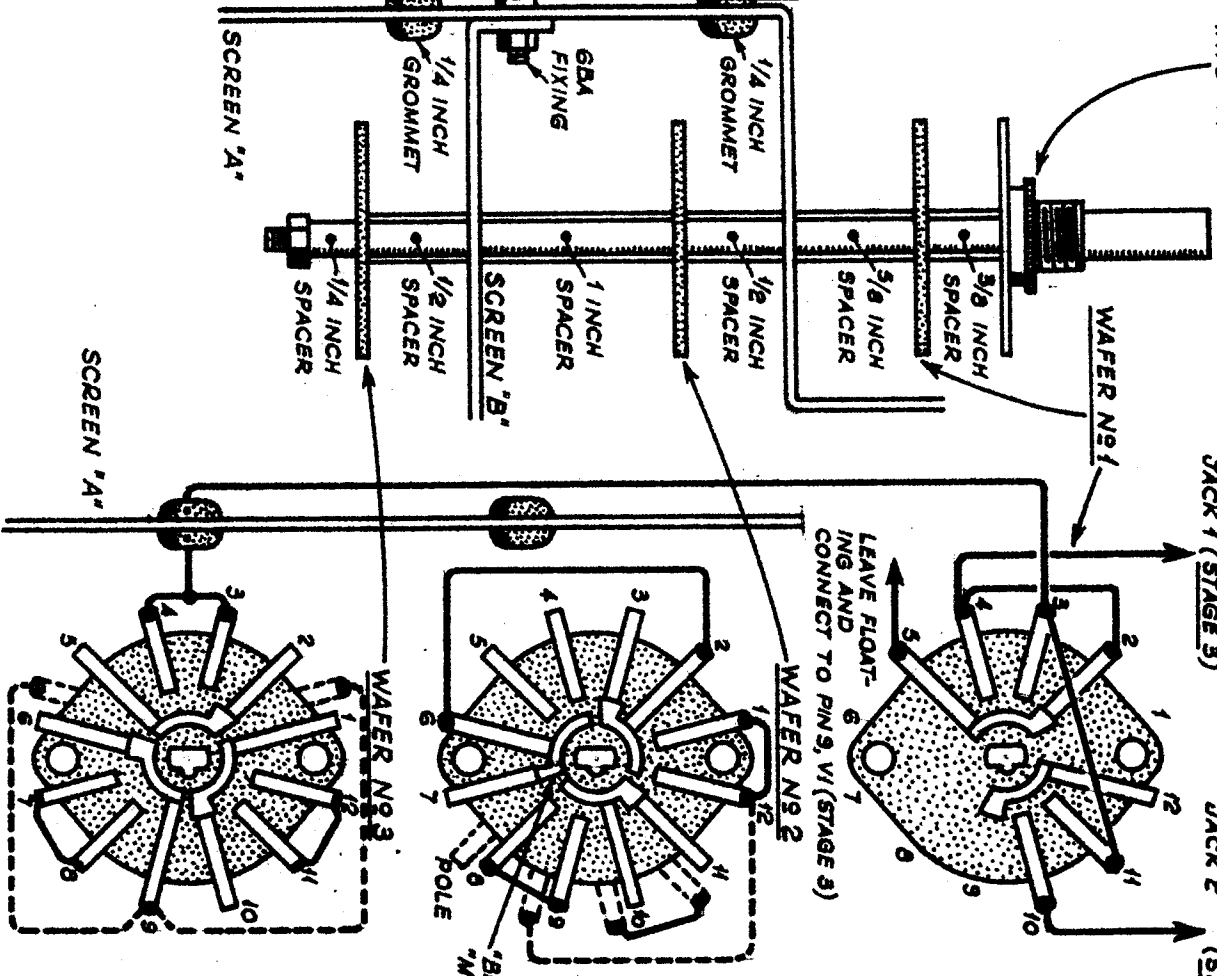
SWITCH ASSEMBLED TOP VIEW
